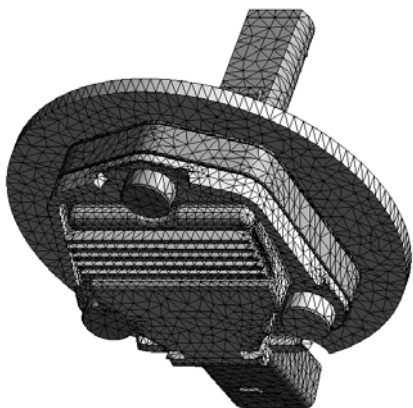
Meshed oil level gauge with bolts, seal and the section of the oil pan case.
